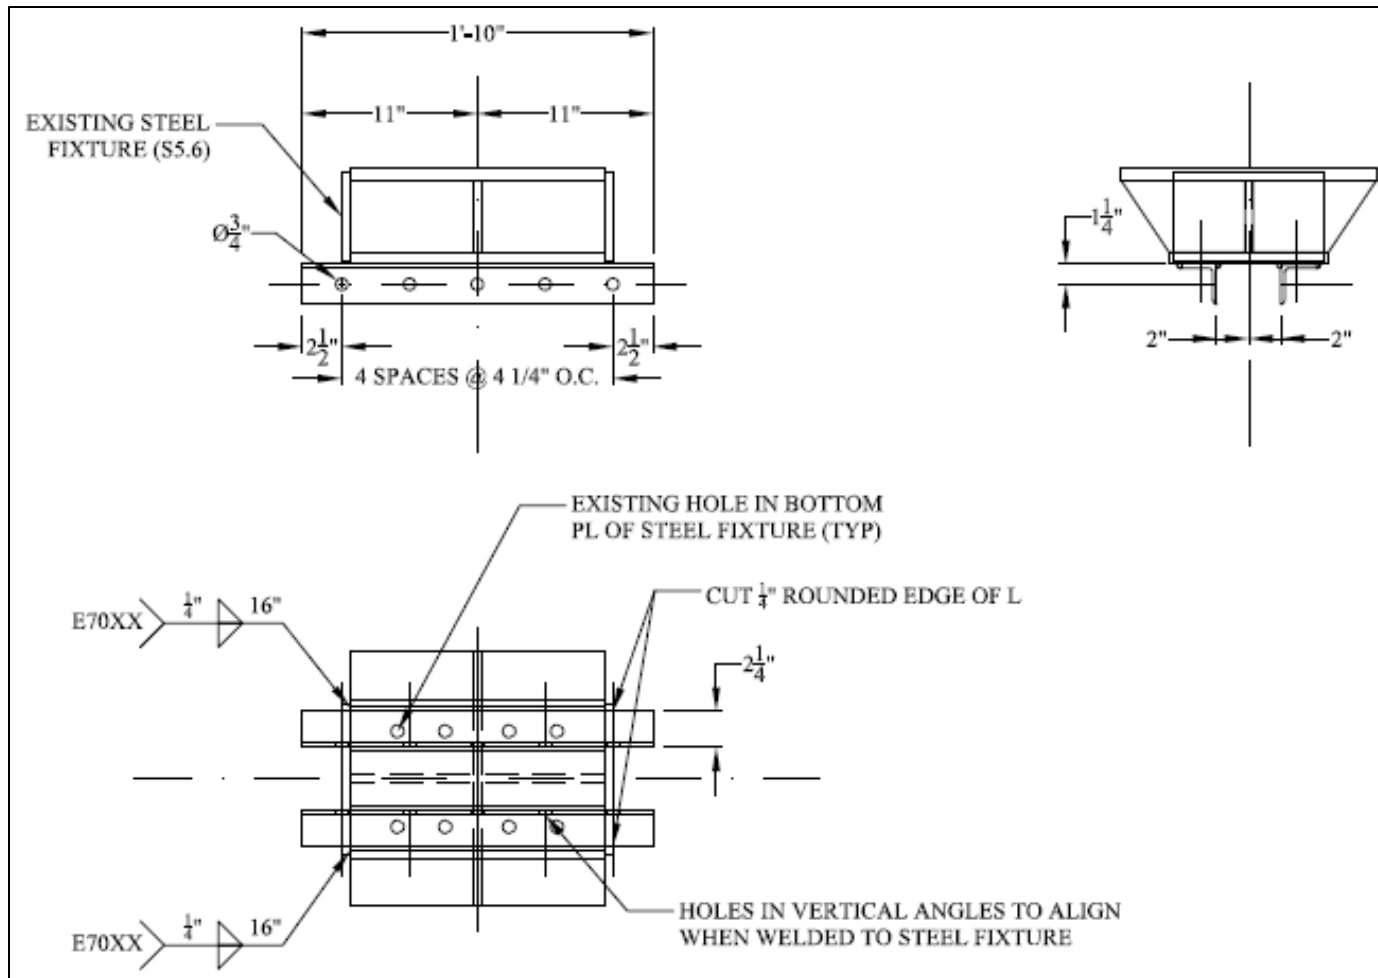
Alt Fuse 3 steel fixture with welded angles.
